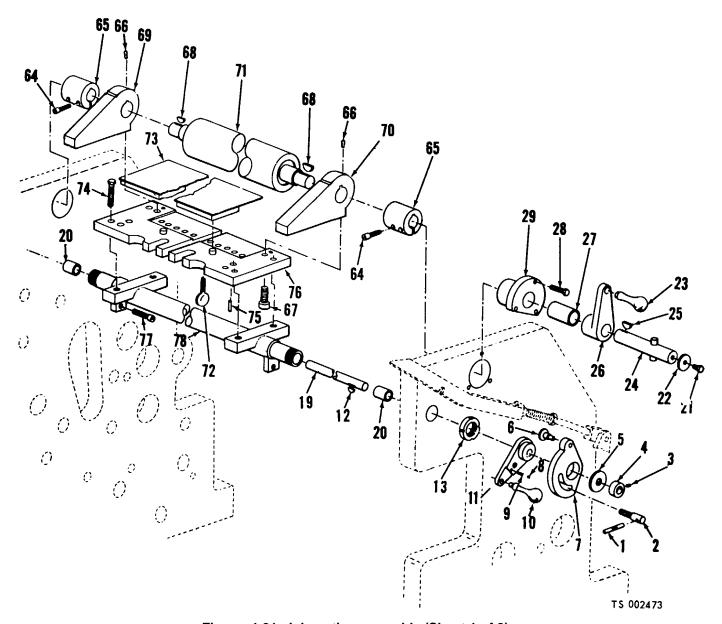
Ink motion assembly (Sheet 1 of 8).
